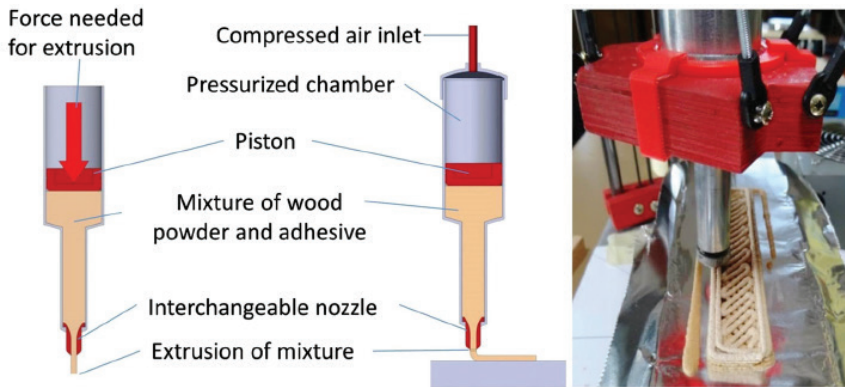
a Test setup for measuring the extrusion force by means of a universal testing machine (left) and the test set-up for 3D printing with a pressurized chamber (right),
